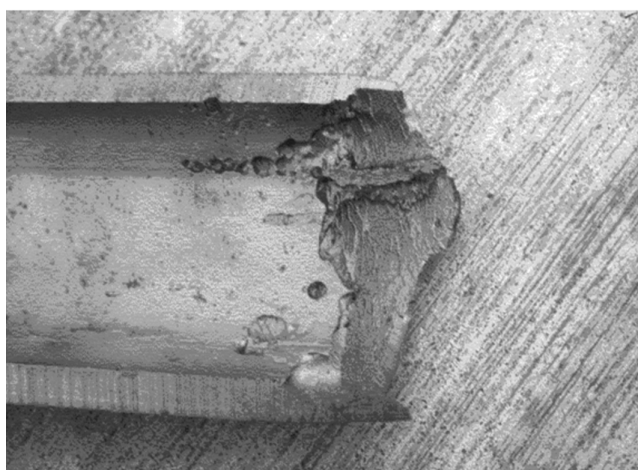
Erosion corrosion due to cavitation on a stainless steel pump impeller.<sup>55</sup>
